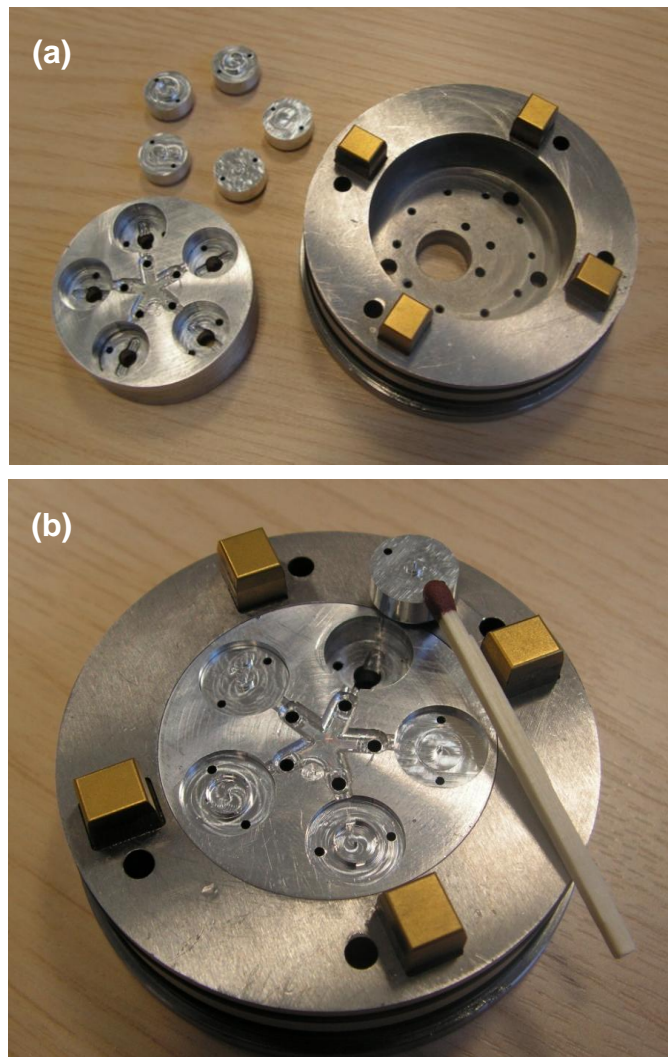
Reconfigurable micro-injection mould (a) disassembled and (b) assembled
